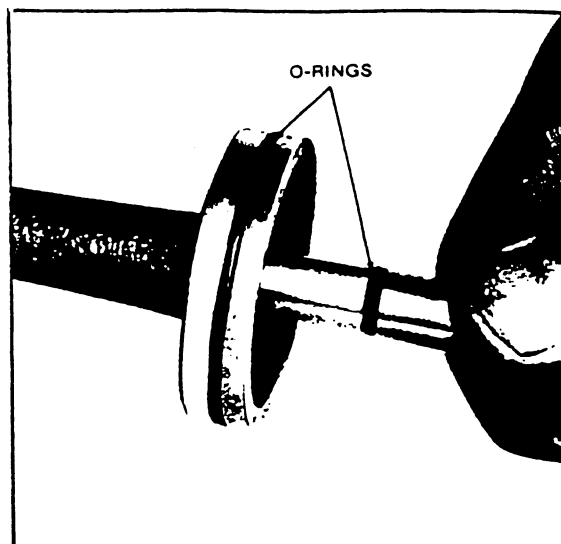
INSPECTING SEAT SEALING SURFACE OF RELIEF VALVE
